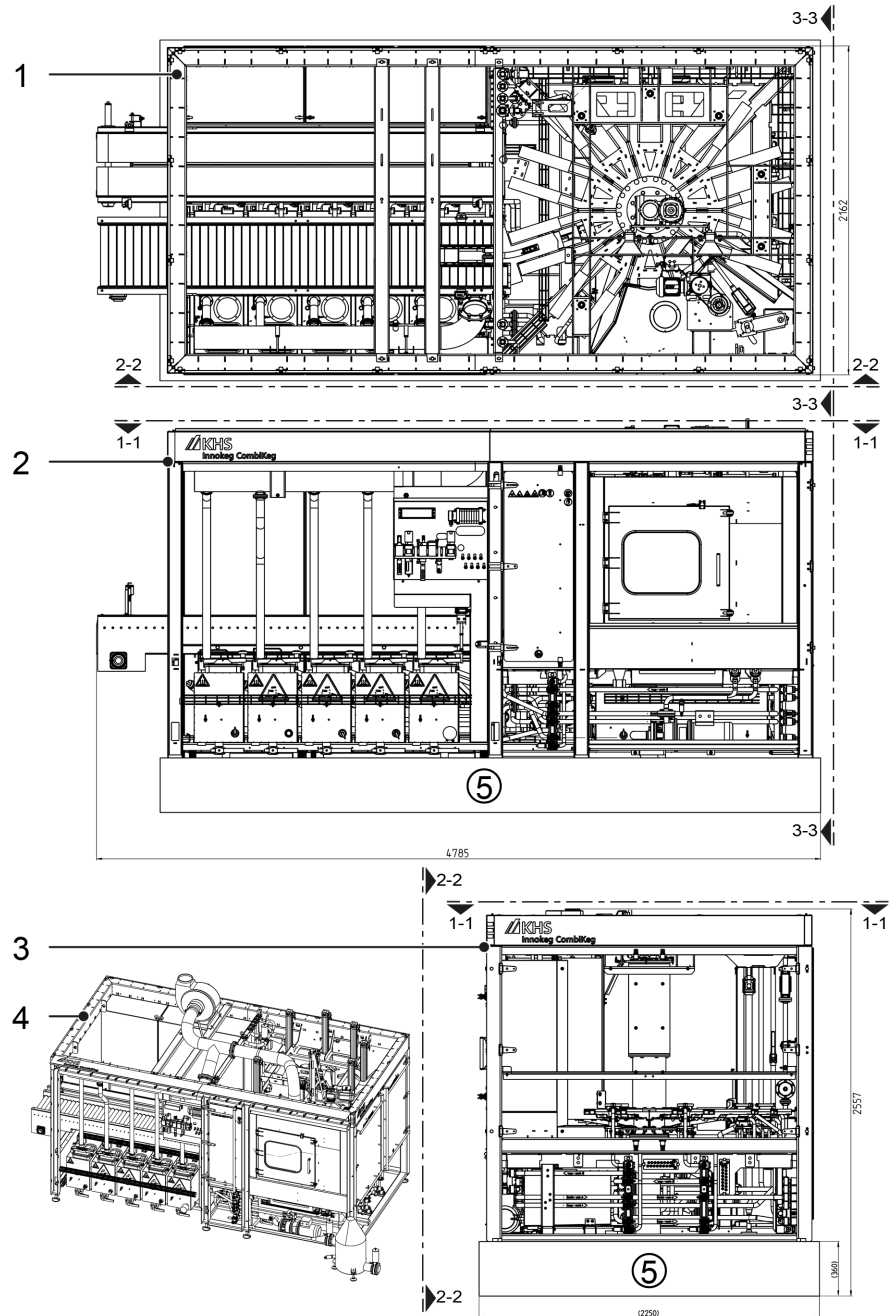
Dimensions of CombiKeg R5 with driven infeed roller conveyor and 5 detergent tanks
